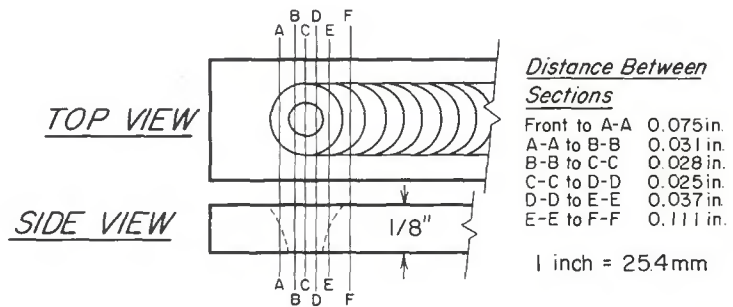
Sketches showing cross sections through a keyhole mode plasma arc weld
